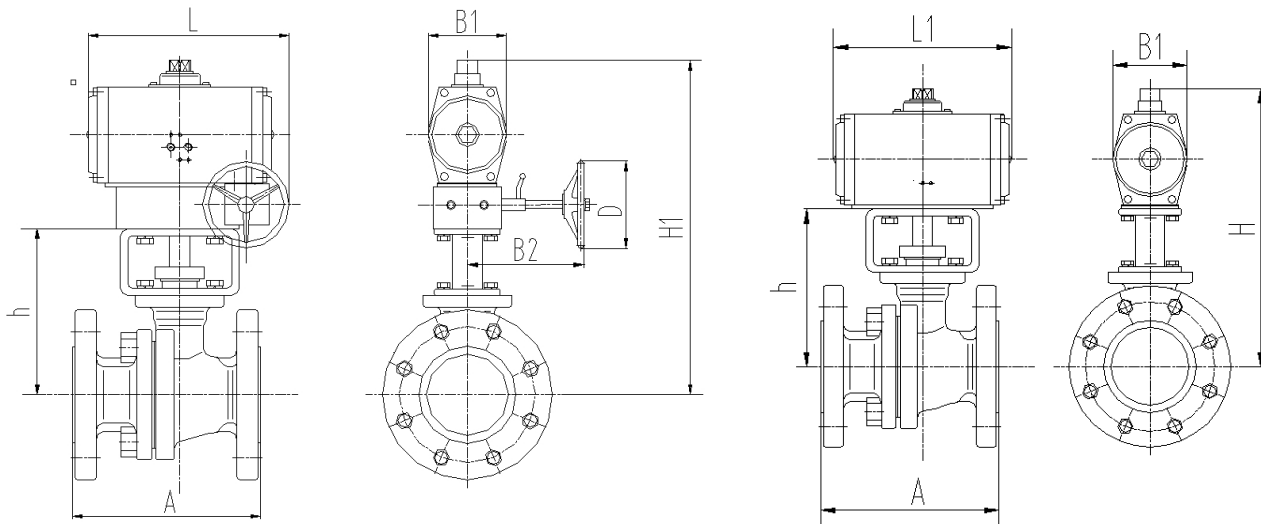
Overall Drawing With and Without Handwheel For 1/2" DN15~1.5"DN40
